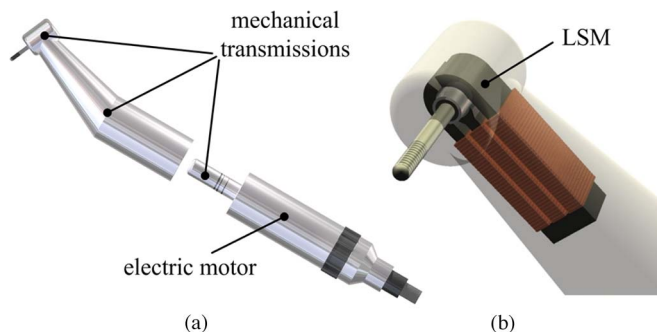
(a) Dental hand piece with a low-speed motor and several stages of mechanical transmission. (b) A direct-driven dental hand piece using a LSM.
